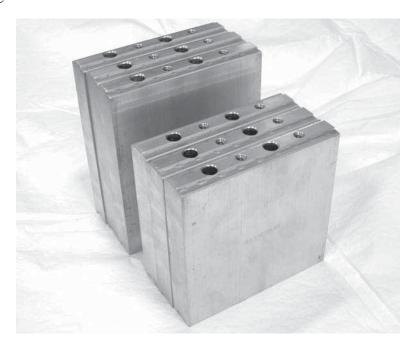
Two sets of extension legs allow the standard mandrel to be mounted in pipes up to 23.64" I.D.
